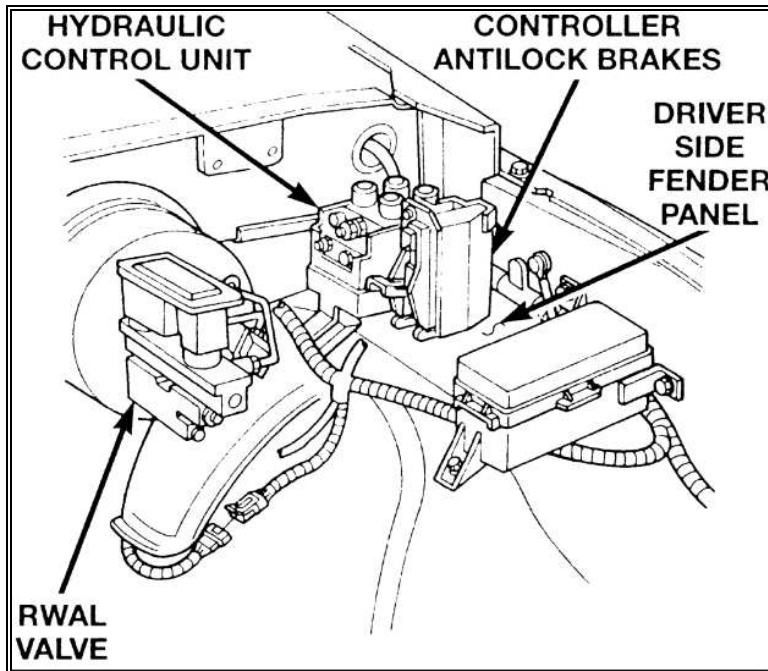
Location of Hydraulic Control Unit in car engine.
